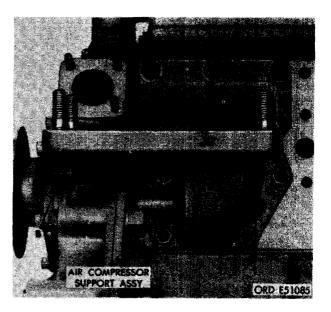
REMOVING OR INSTALLING AIR COMPRESSOR SUPPORT ASSEMBLY.
